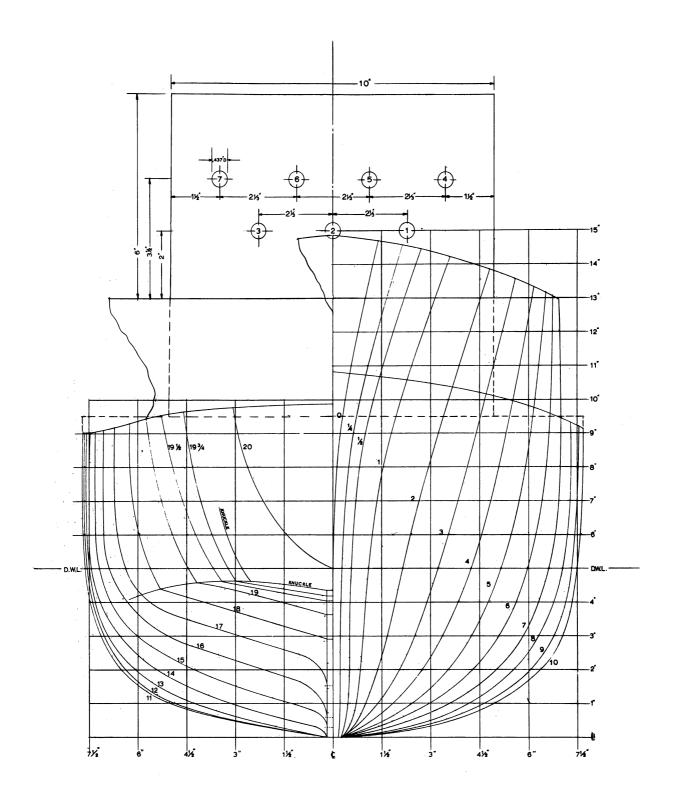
View of Destroyer Model Showing Deckhouse Configuration and Location
